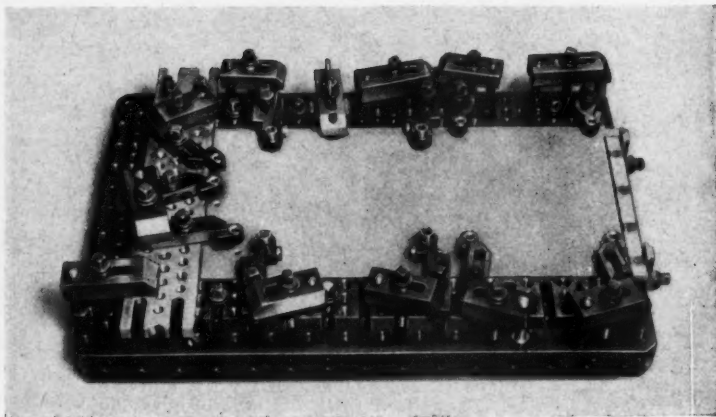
A close-up view of the drill jig seen in course of construction in Fig. 4, showing the rebated plates which hold the work to be drilled clear of the base plate, and the bush holders which can be fitted with bushes of different bore diameters
